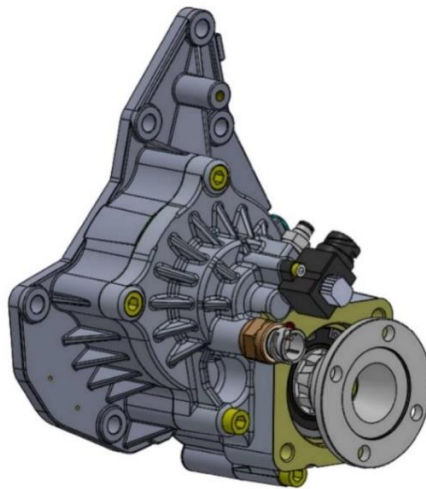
Rear DT12 PTO driveshaft assembly with the 1:1.83 ratio
